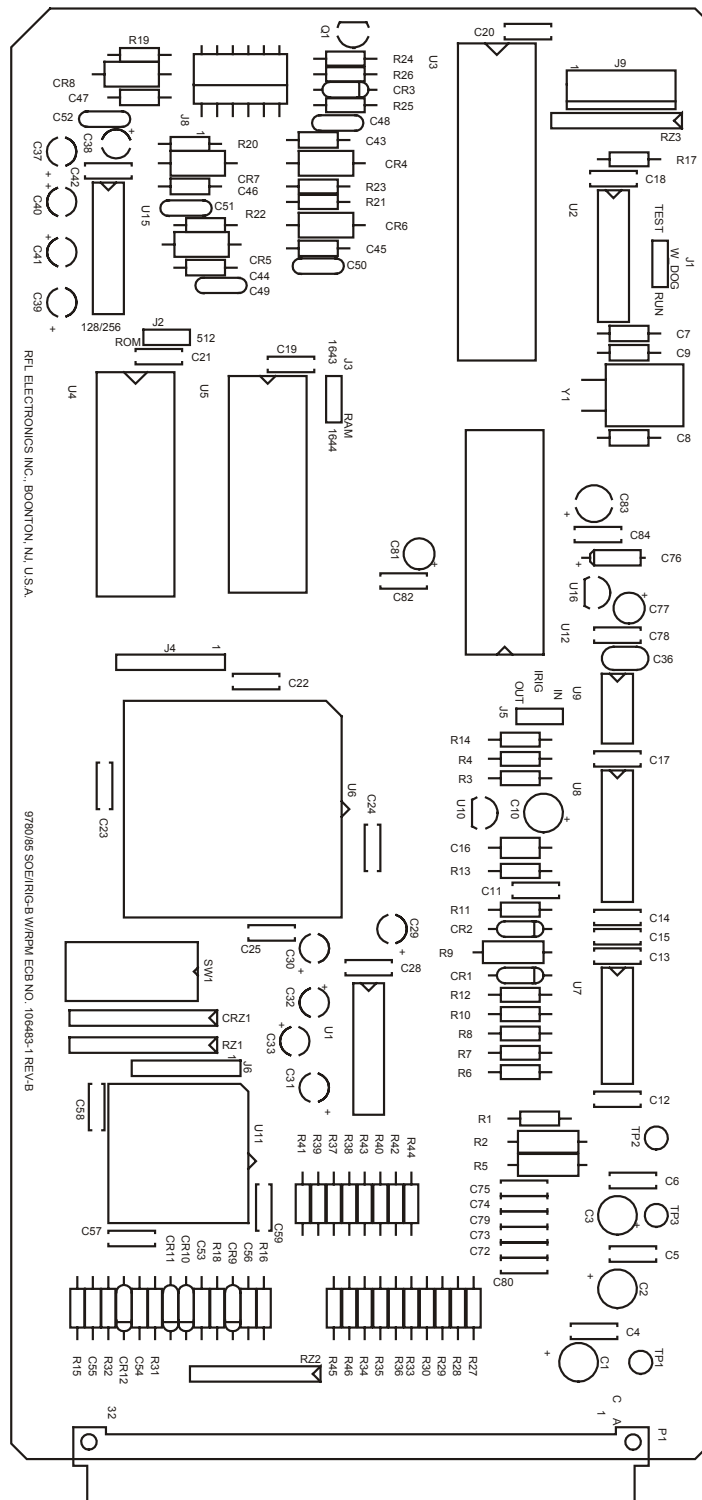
Component locator drawing, RFL 9785 SOE/IRIG-B module
